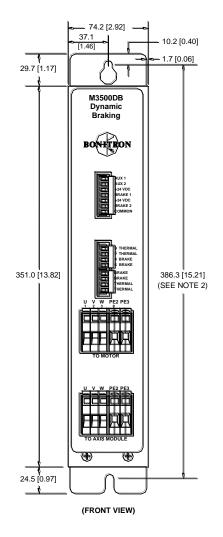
Dimensional Outline for the 32A & 43A M3500DB(4)
